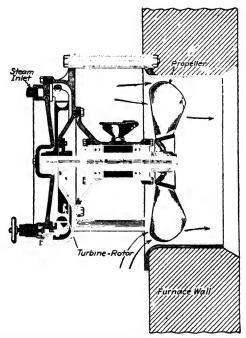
Sturtevant turbo-undergrate propeller blower.
